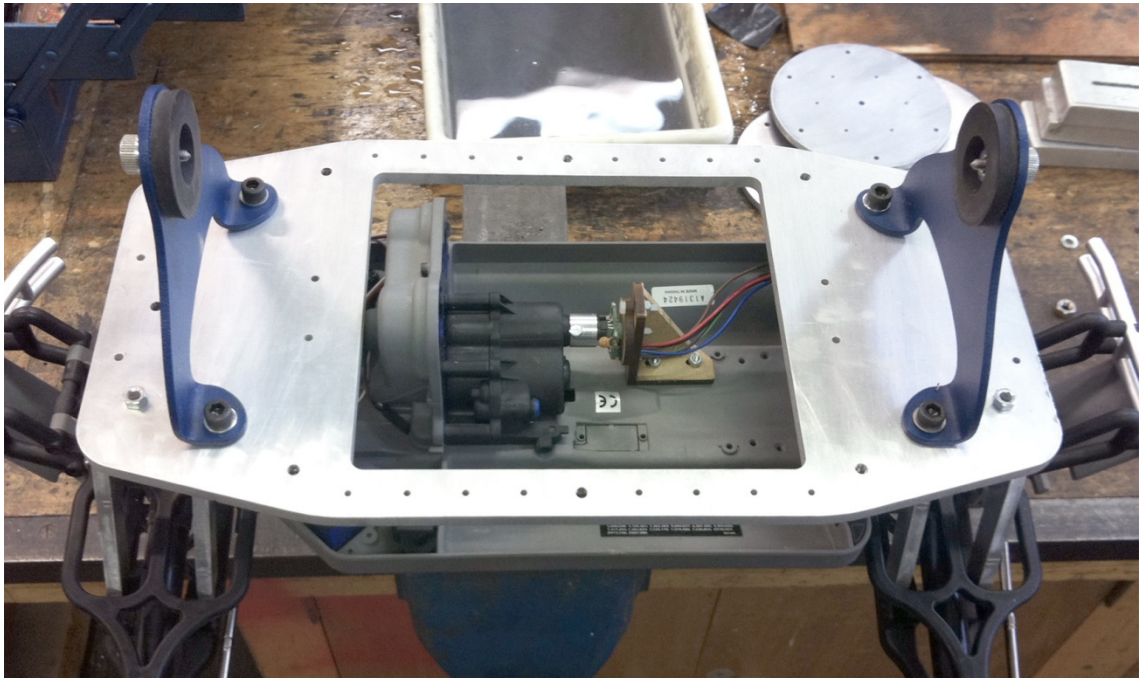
Aluminium mounting plate. A large aluminium plate was designed and installed to add strength to the original chassis and accommodate the mounts for the Main System Controller.
